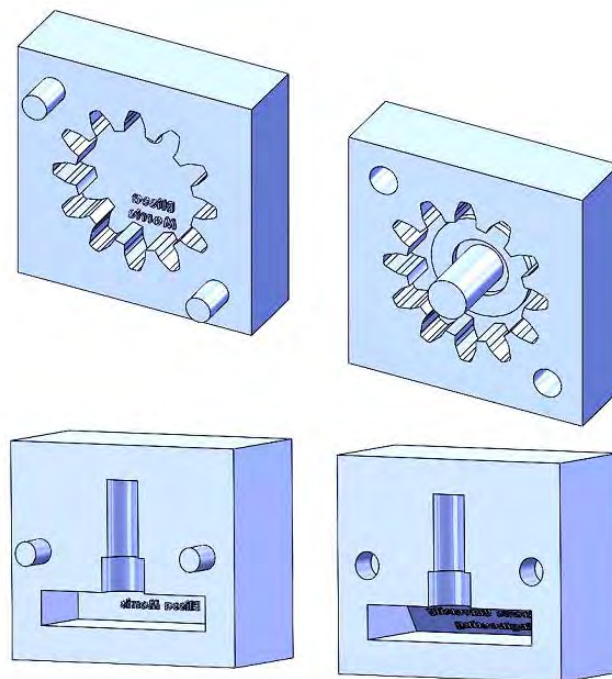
CAD drawing of the gear and mounting stand combination set mold. Note that there was no provision made for the pouring of the molten metal into the mold.
